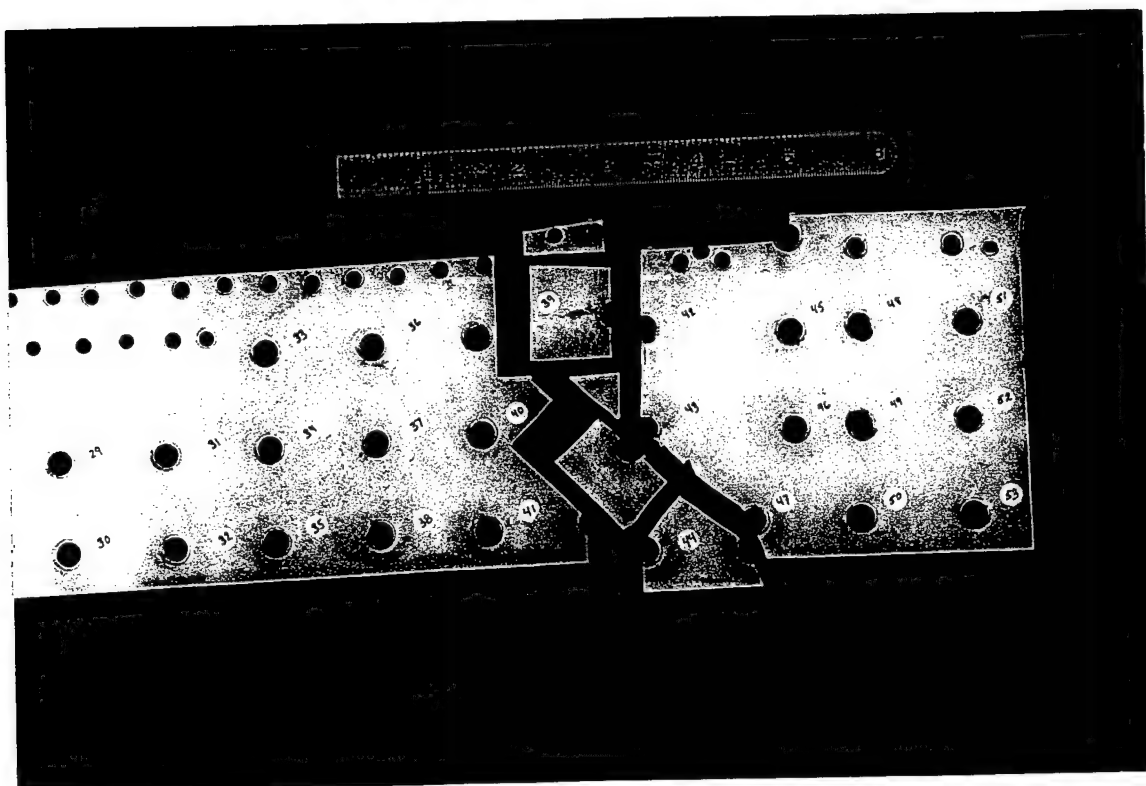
Outside Surface Of Lap Joint Section with Cuts For Metallographic Cross Sectioning.
